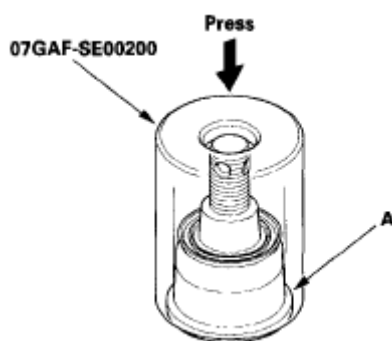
Pressing Boot With Attachment Until Bottom Seats On Lower Ball Housing
